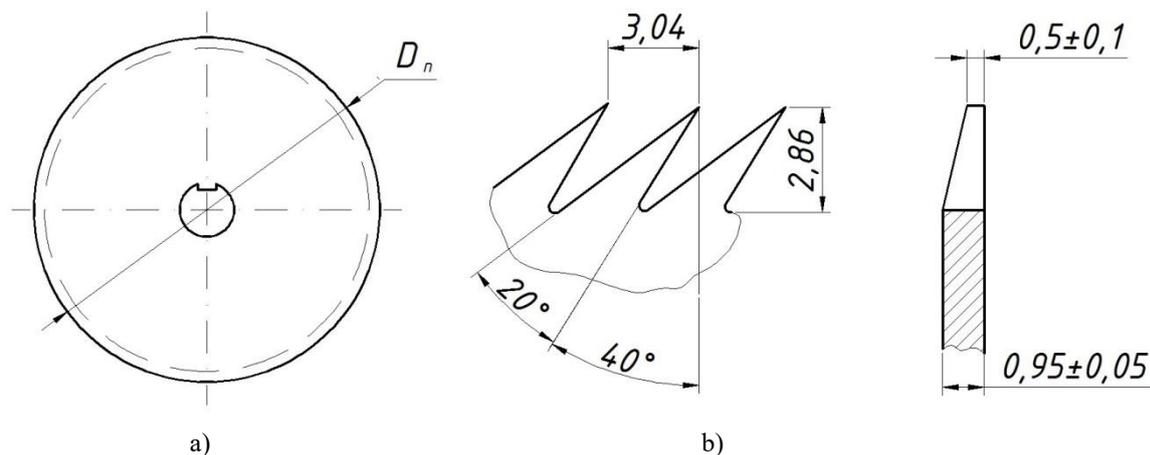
Linter saw with diameter  $D_n$  (a) and tooth profile with dimensions of geometric parameters (b)
